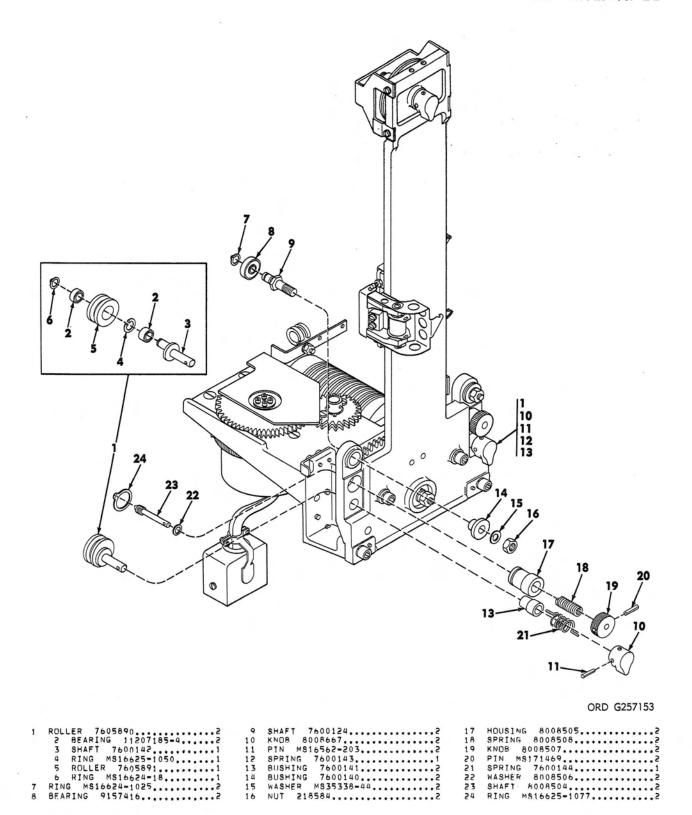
CARRIAGE, PEN /8171889/-PARTIAL EXPLODED VIEW /SEE FIGURE 130 FOR NEXT HIGHER ASSEMBLY/
